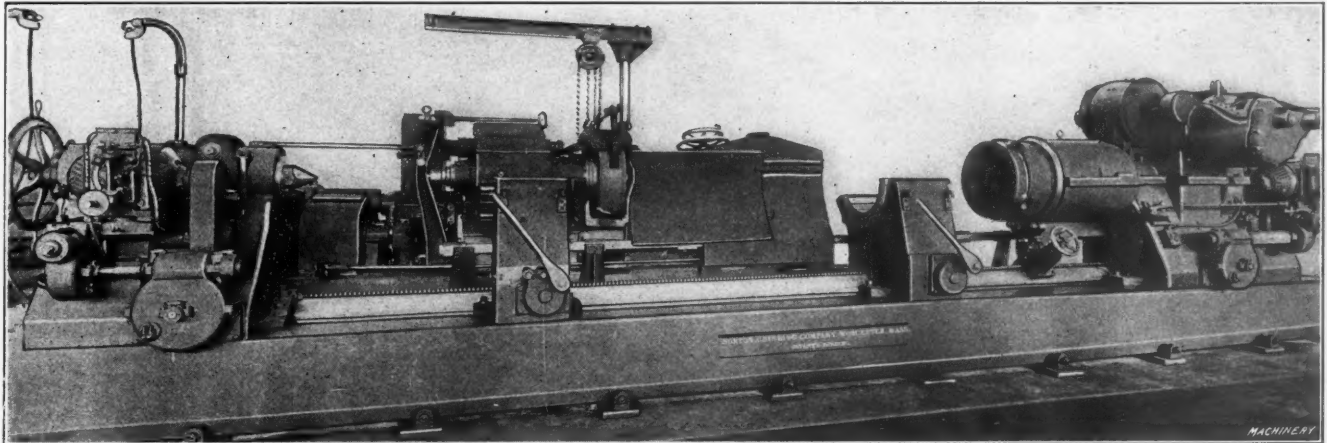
Rear View of Norton Roll Grinding Machine showing Roll removed from Bearings
